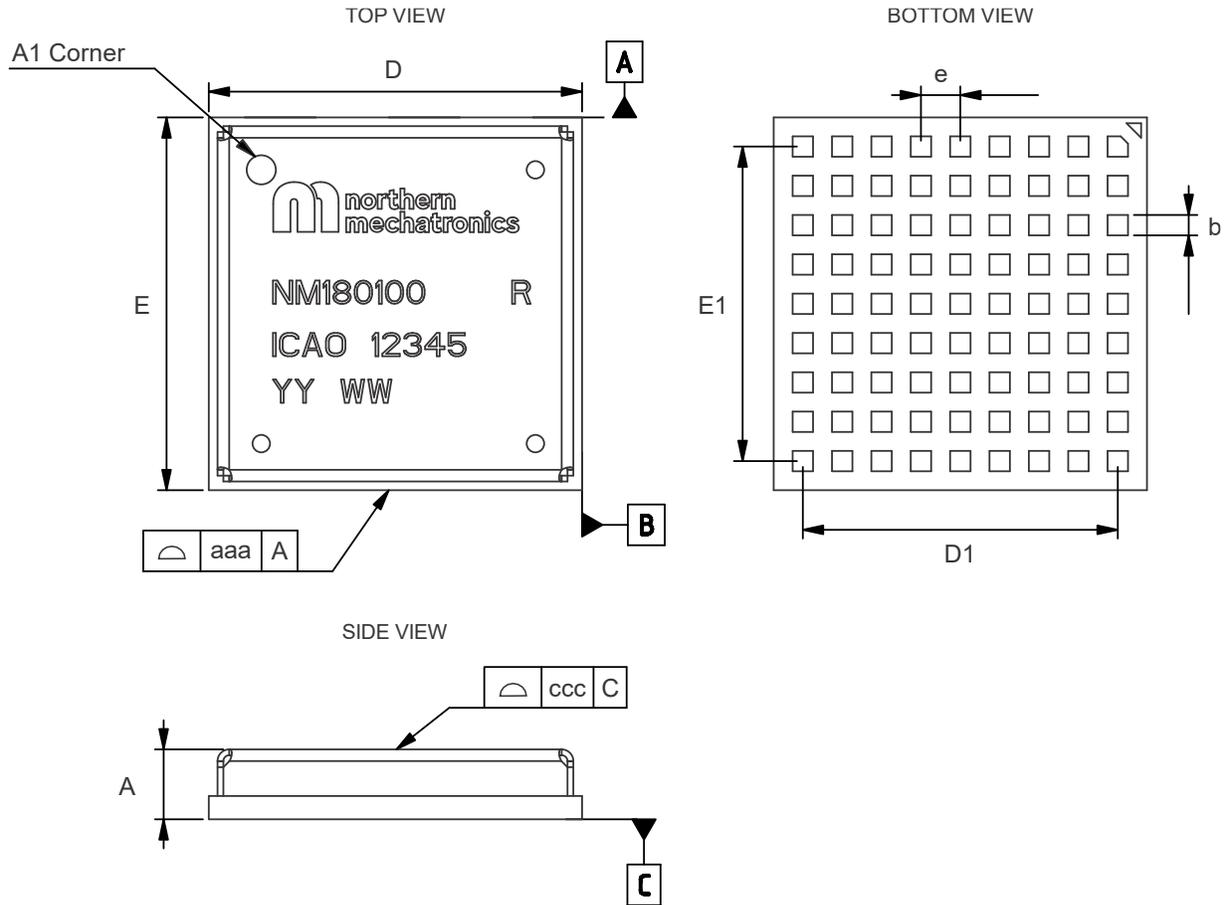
LGA 81 pad, 12.8mm x 12.8mm package outline.
